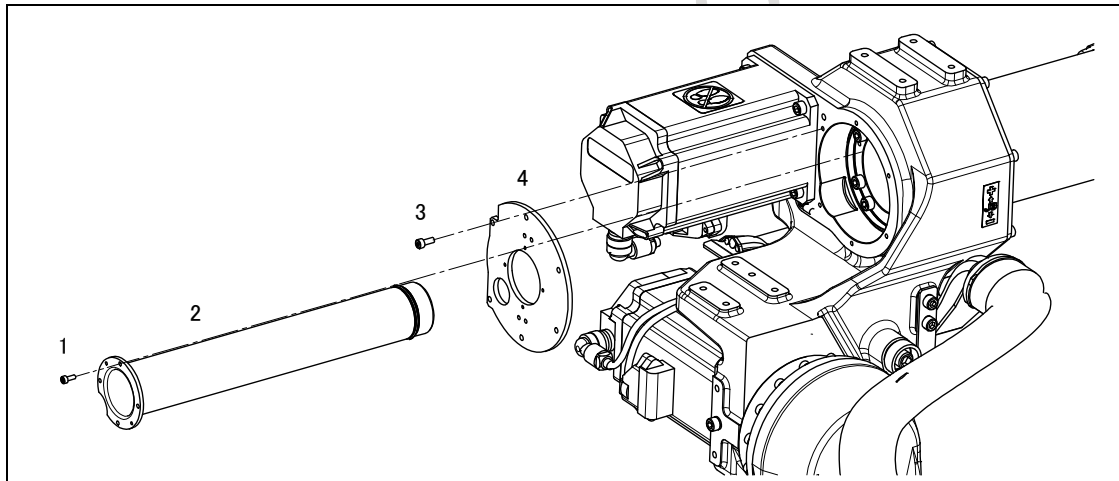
(a) Replacing the J4-axis gearbox unit
